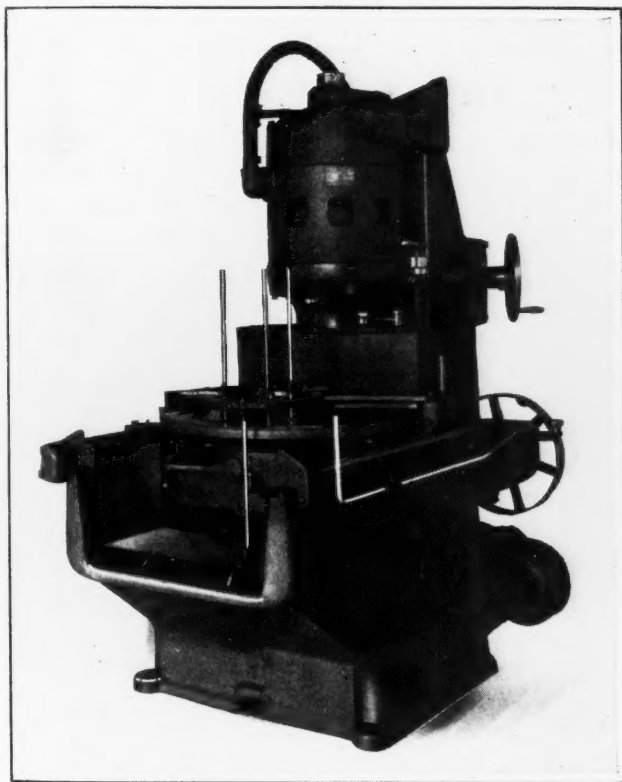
Blanchard Grinder for Asbestos Clutch Facings
